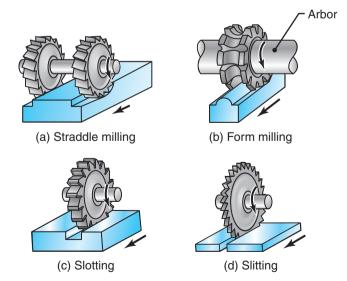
Cutters for (a) straddle milling, (b) form milling, (c) slotting, and (d) slitting with a milling cutter.
